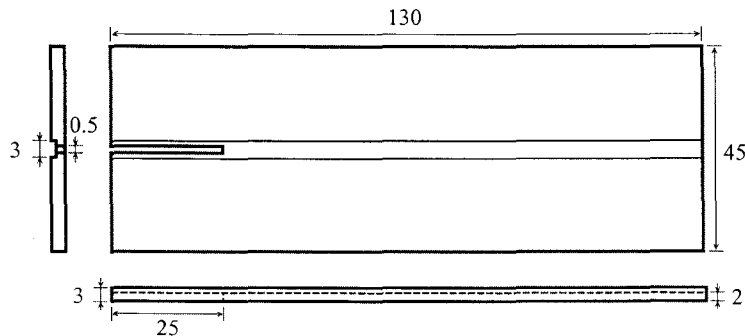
Dimensions of DT specimen used in this research (unit : mm).
